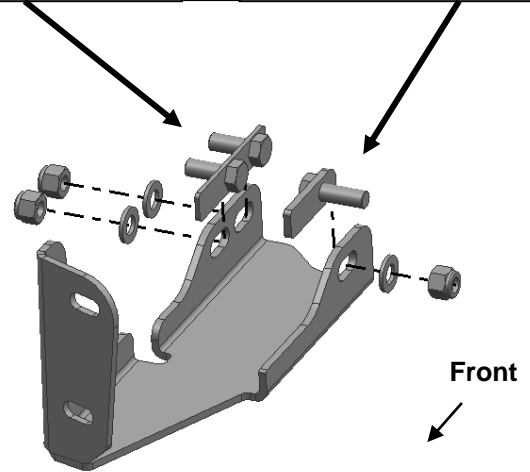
Turbo Charged (gas and diesel models) with tow hooks only. Partially remove the shutter assembly to remove tow hooks and hardware (arrows)
